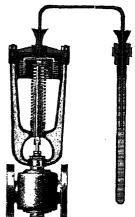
VAPOUR PRESSURE/MERCURY TUBE THERMOSTAT
